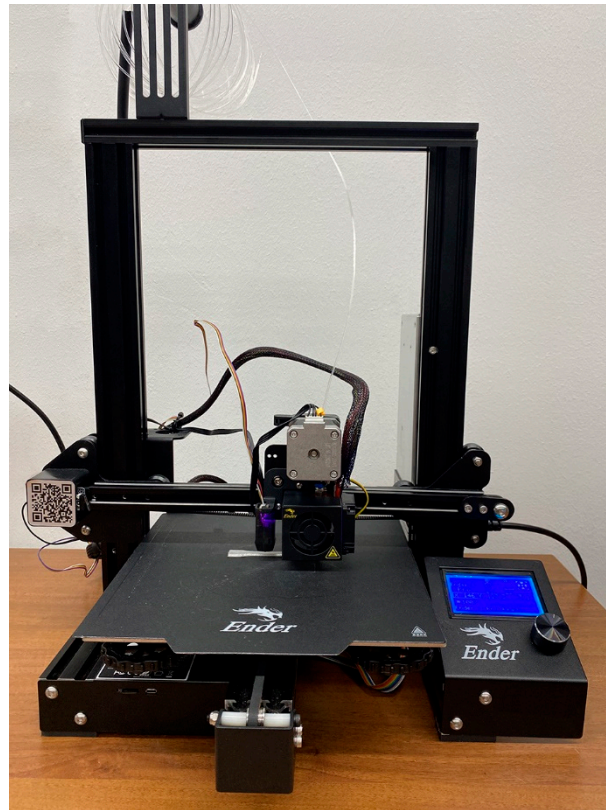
Photograph of the Ender 3-Pro 3D printer.
